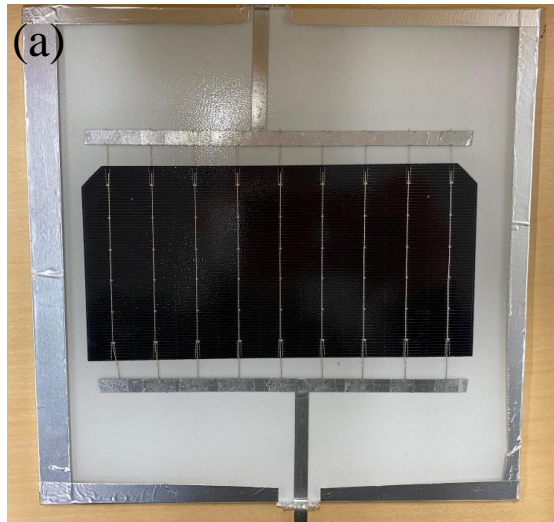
(a) Front picture of one solder bonding PV module.
